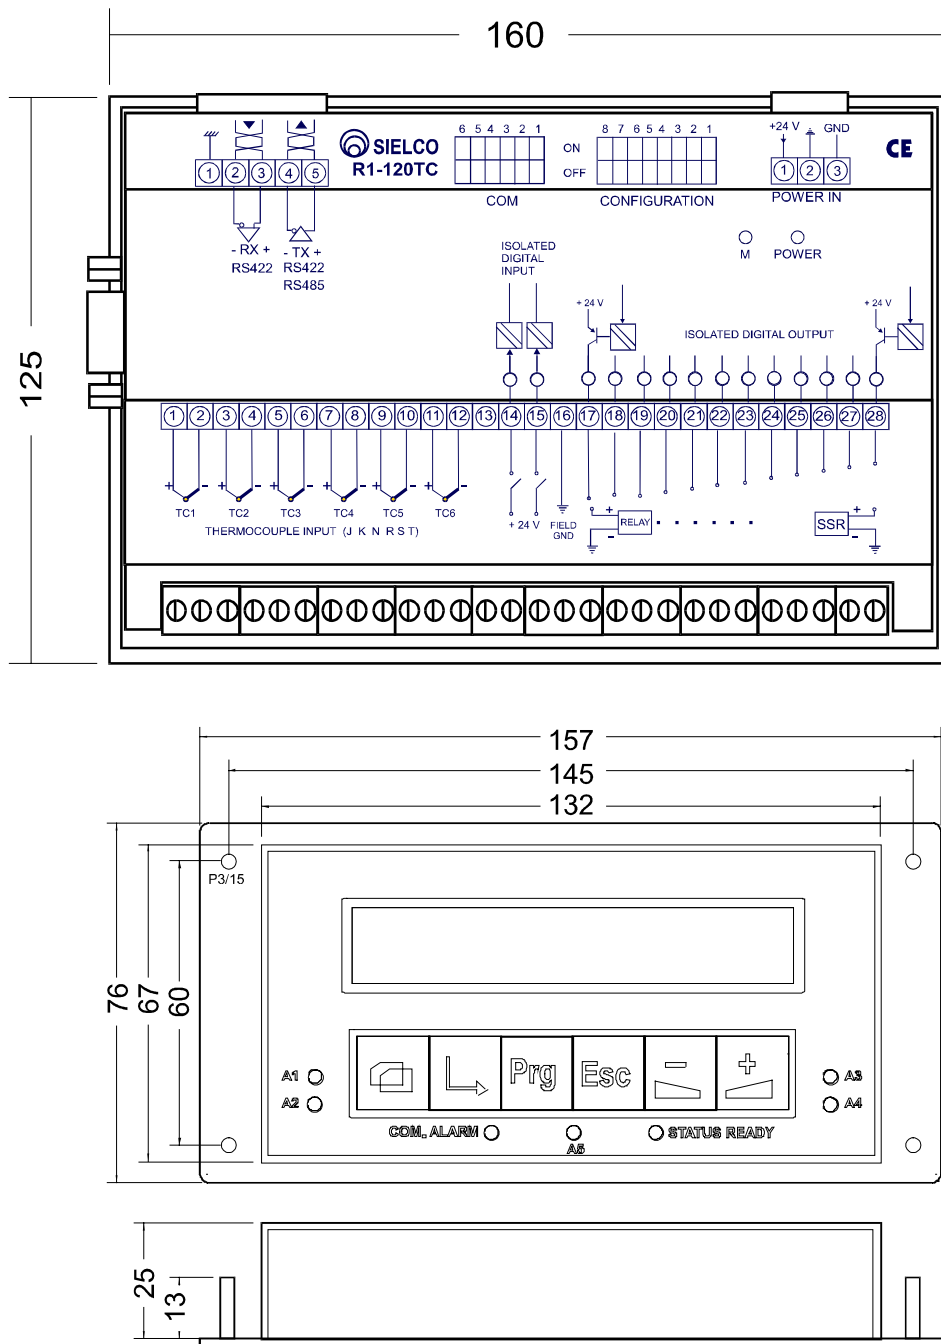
R1-120A-I controller and F1-10 panel dimensions.
